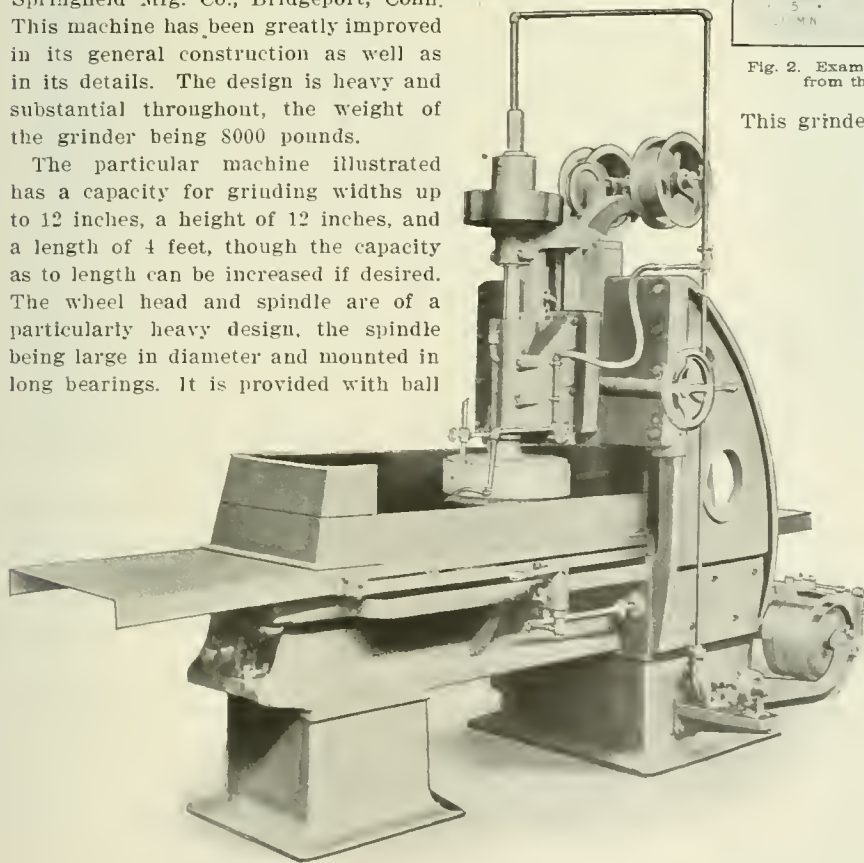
Grinding Planer built by the Springfield Mfg. Co.
